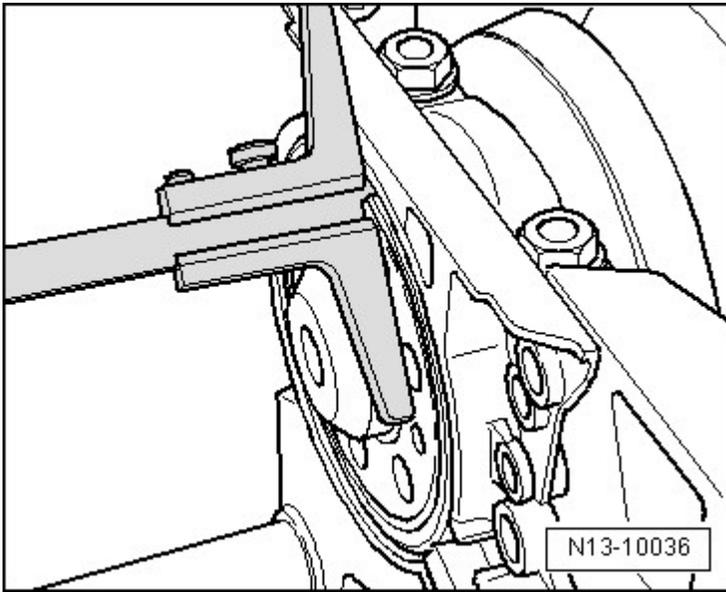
Identifying Caliper Gauge Set Onto Crankshaft Flange
